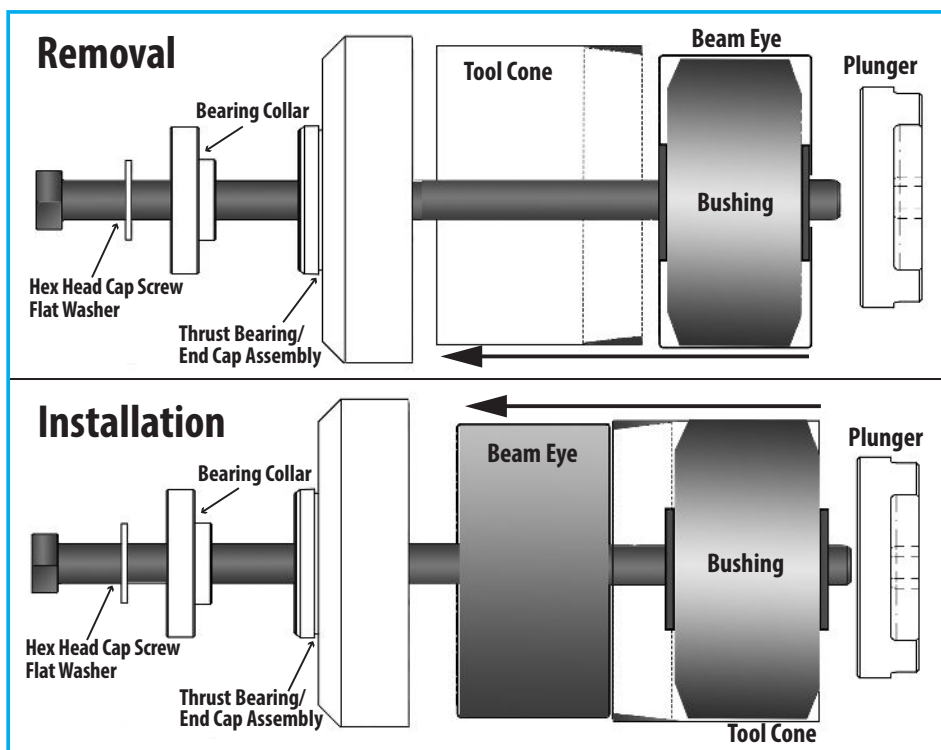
Place the tapered end of the tool cone against the beam eye for bushing removal and installation.
